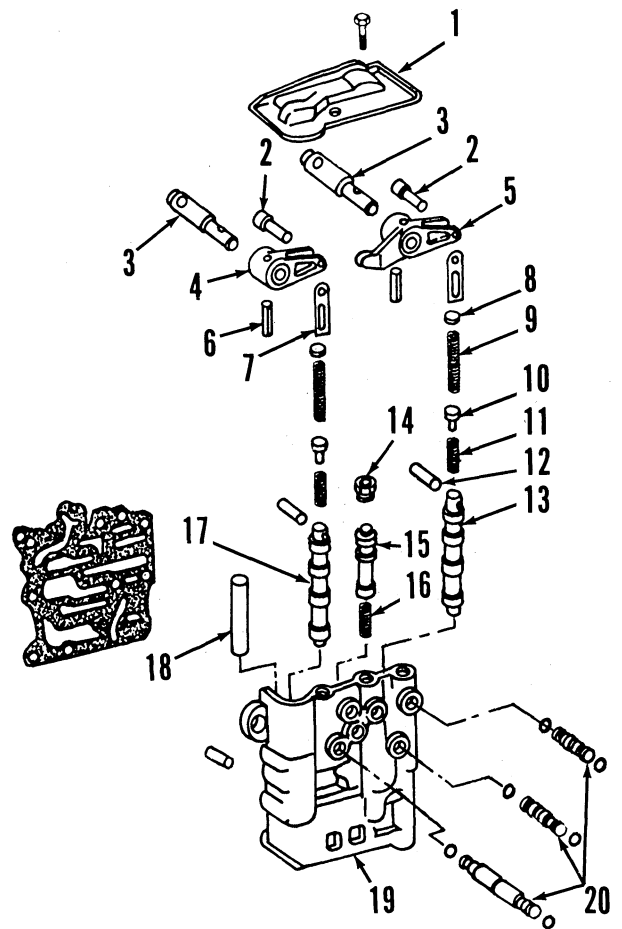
A—Exploded view of clutch valve inner housing assembly.
